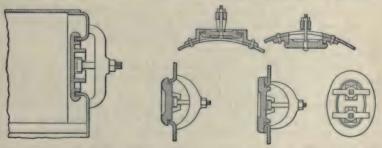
Flanged Manhole. Fig. 176.—Manhole and Handhole Plates.
